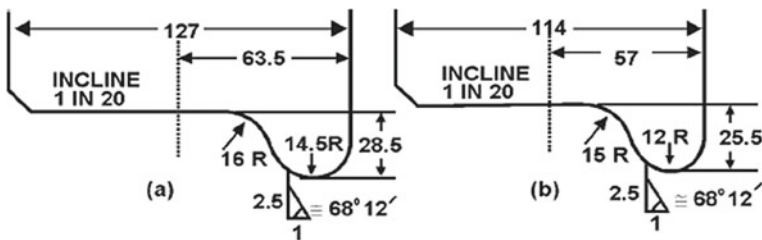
IRS wheel profile: a broad gauge wheel and b meter gauge wheel (The Investigation of Derailments 2021)
